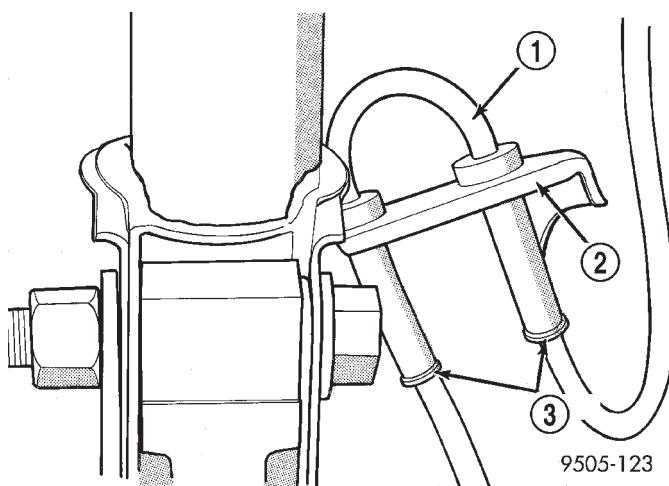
Front Wheel Speed Sensor Attaching Bolt
